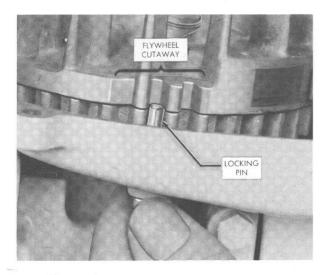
Locking Pin Cutout in Flywheel (Fan Housing Removed)
